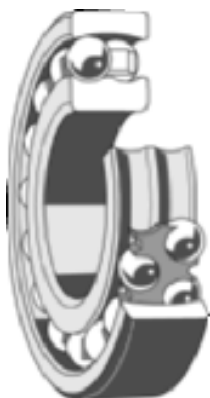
Self-aligning ball bearing (SKF USA, Inc.)
